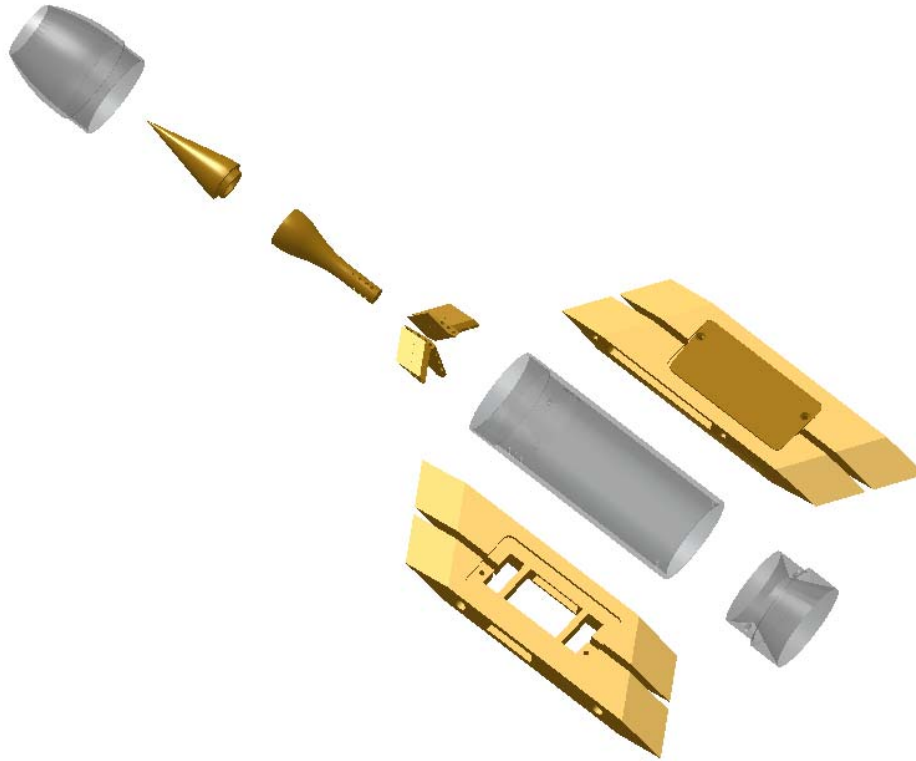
Exploded view of all parts of ramjet including wind tunnel support struts.
